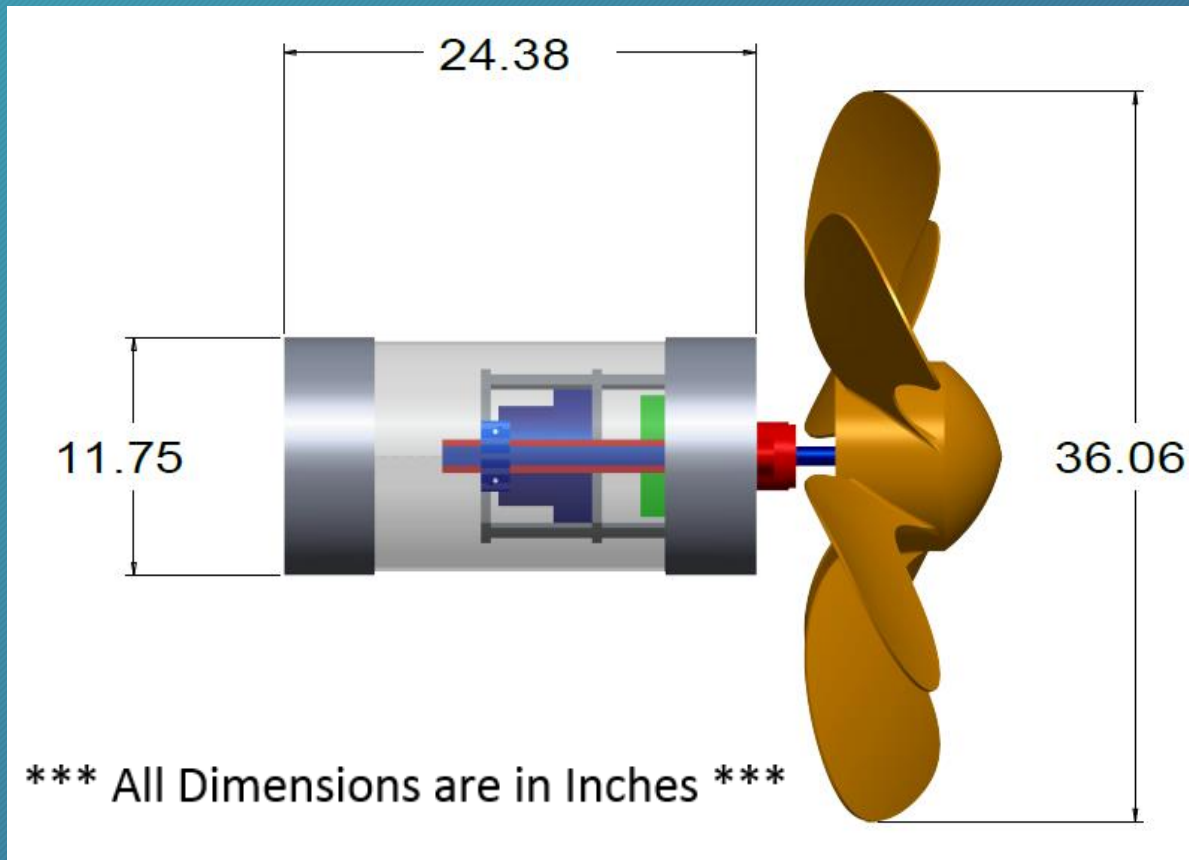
Hydroelectric Generator CAD with Dimensions Side - View
